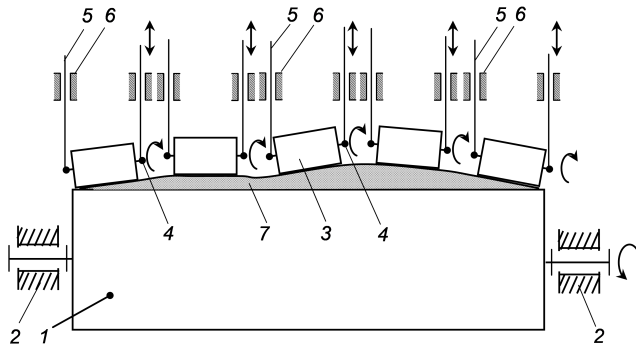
Arrangement of the working rollers (front view) 1 - lower working roller, 2 – frame work, 3 - upper working roll, 4 - support of the upper working roller, 5 - rod, 6 - guide support, 7 - fibrous material
